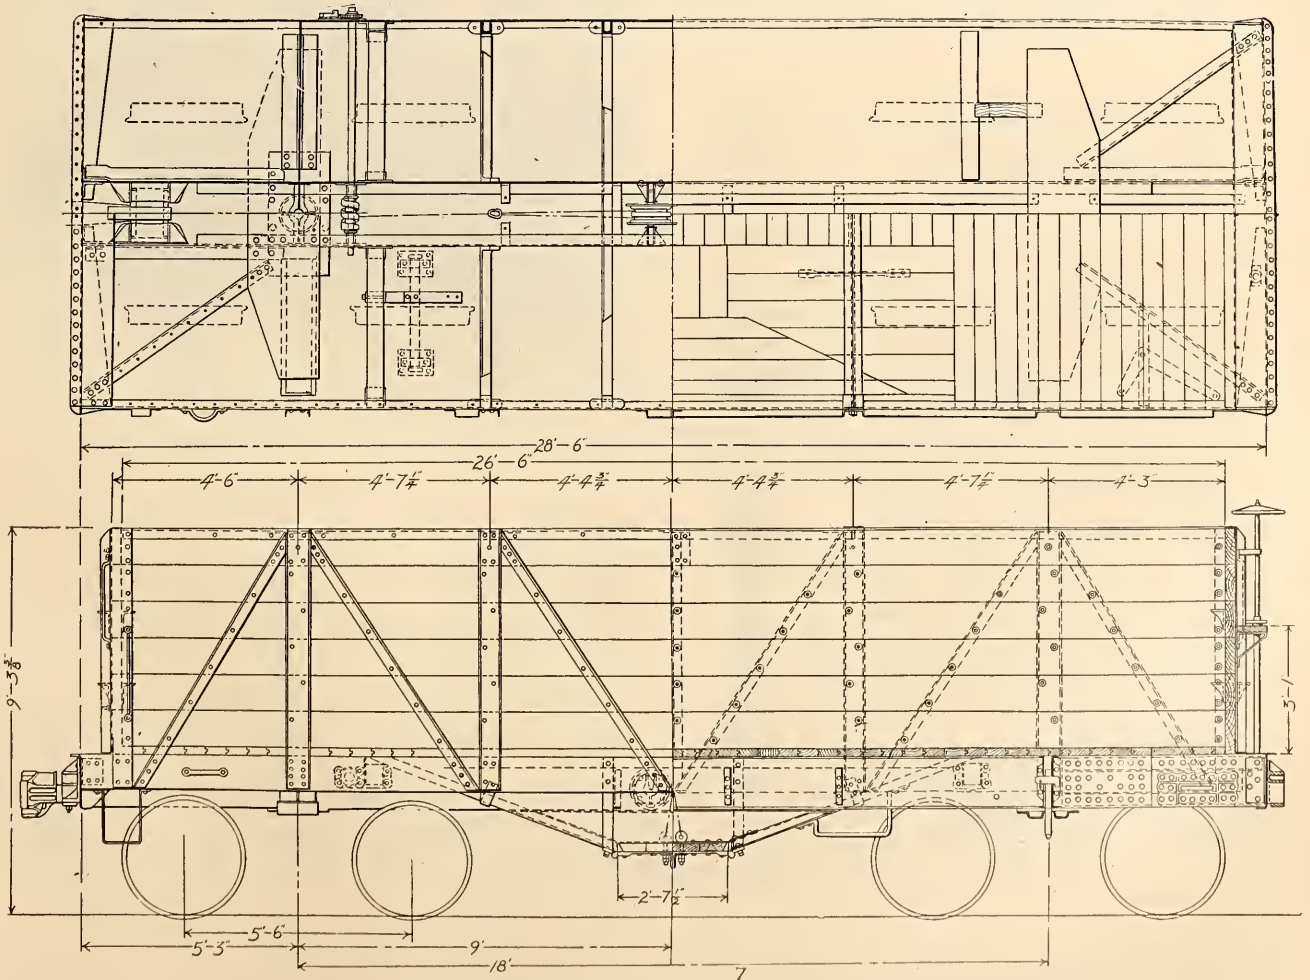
PLAN AND ELEVATION OF HOPPER CAR WITH STEEL UNDERFRAMING.
